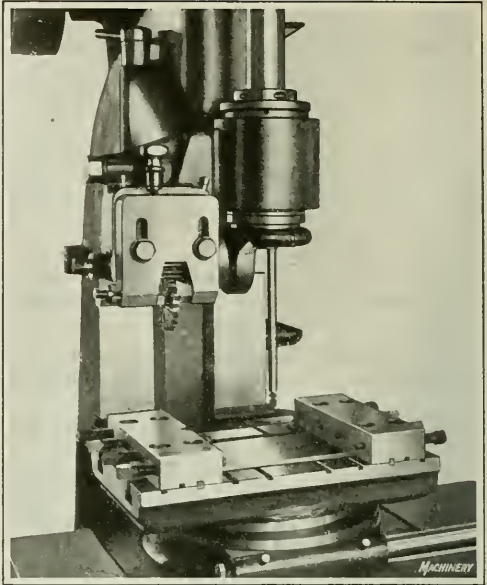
Cherrying Attachment developed for Use on Die-sinking Machines
